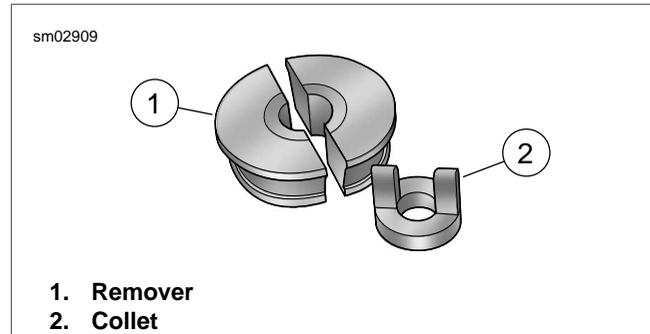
Steering Head Bearing Cup Remover (Part No. HD-39301A)
